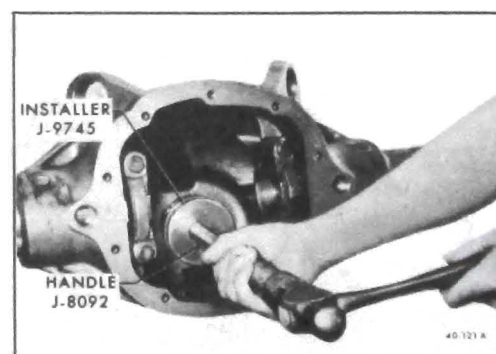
Installing Rear Pinion Bearing Outer Race
